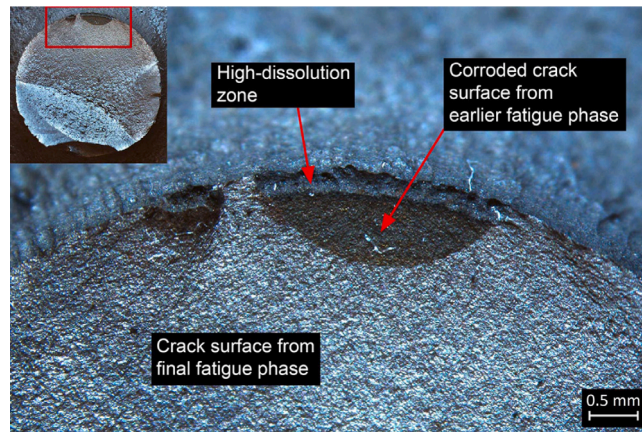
Appearance of corroded cracks on the fracture surface of an ALT specimen after a corrosion phase and subsequent fatiguing.
